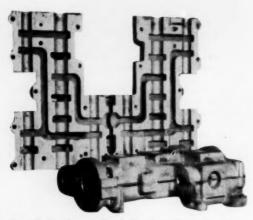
Casting of this hydraulic valve in two parts and assembling by silver brazing simplifies the work of the designer, patternmaker, foundry and machine shop.
